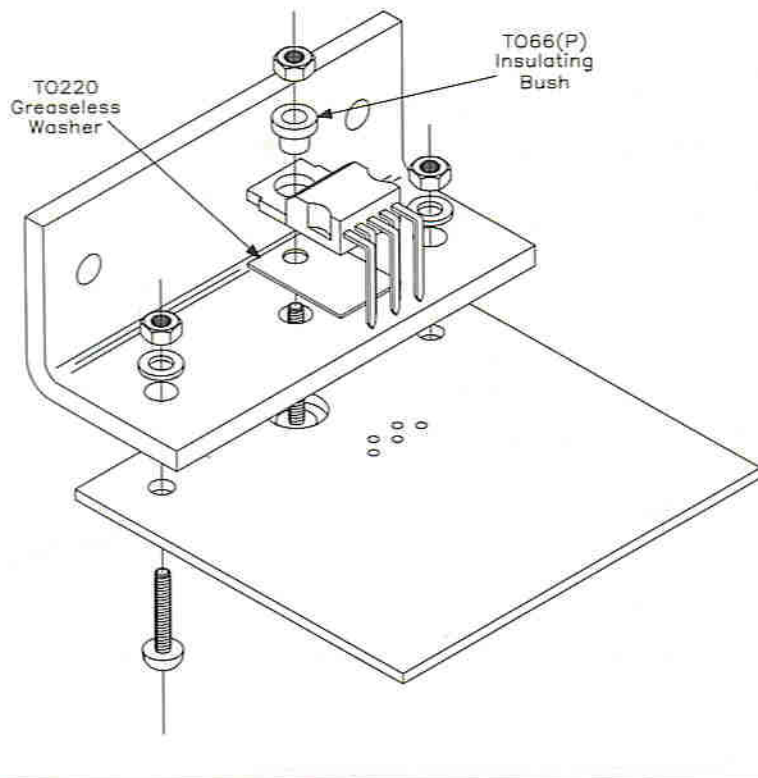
Mechanical assembly of Amplifier Module (isolated heatsink).
